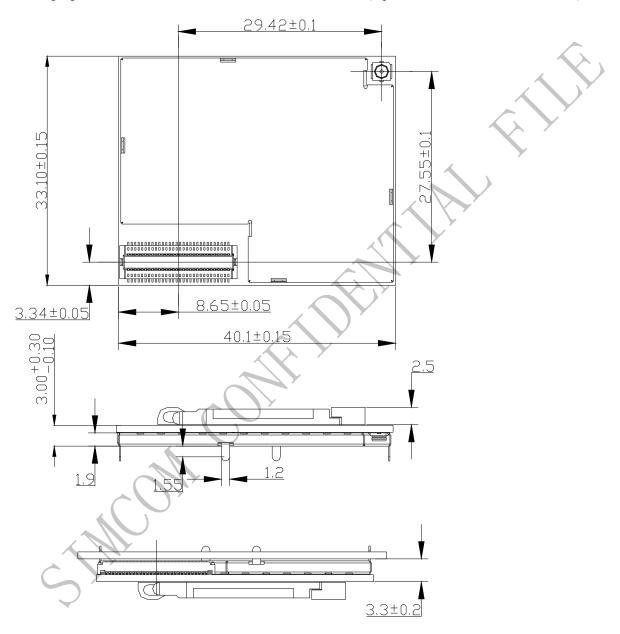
Top an Side Mechanical dimensions of module (Unit: mm)
